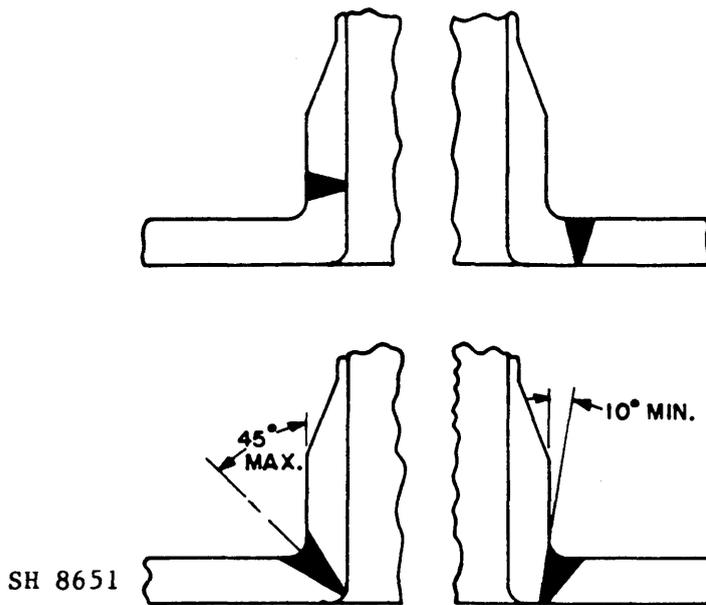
Examples of acceptable weld joint locations.
